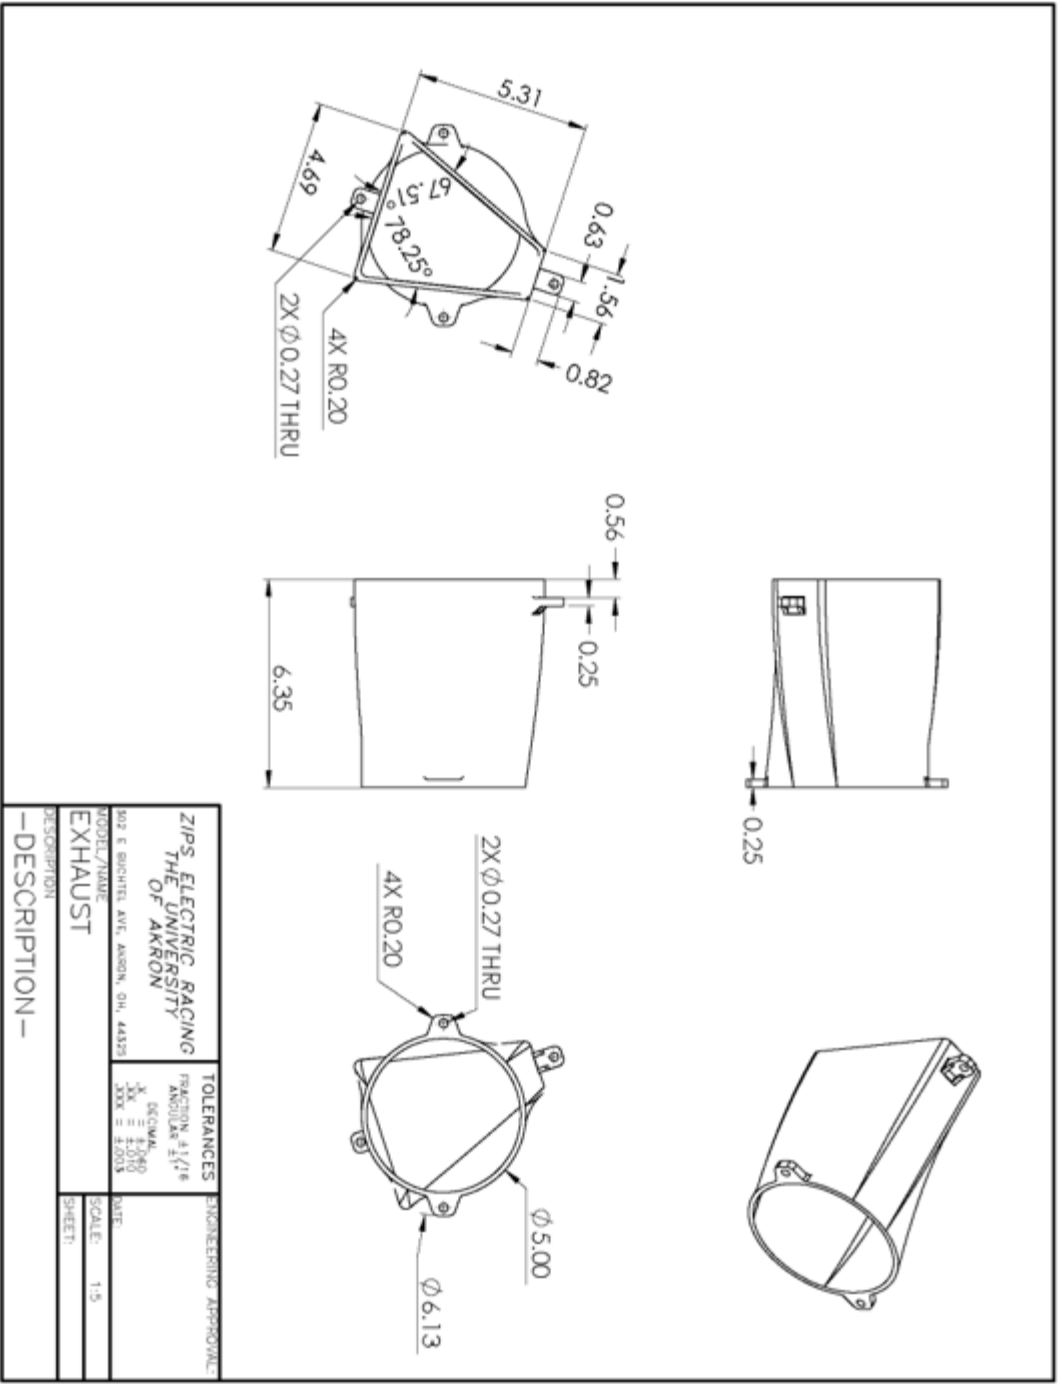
3D Printed Duct Piece which Vents Air Out of the Car
